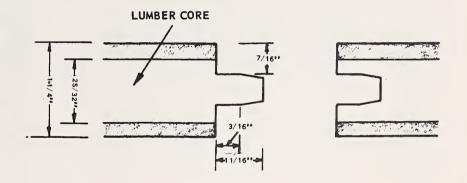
Manufacturing specifications developed for lumber core laminated flooring.
